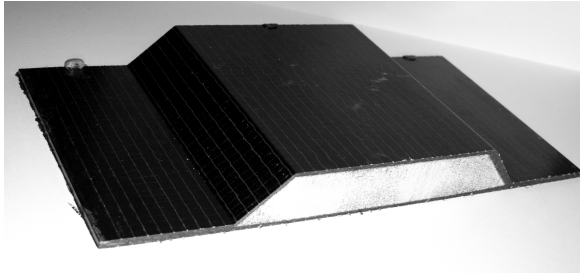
Manufactured RTM sandwich part; the cut shows the top and bottom sheet and the embedded polymer foam core
